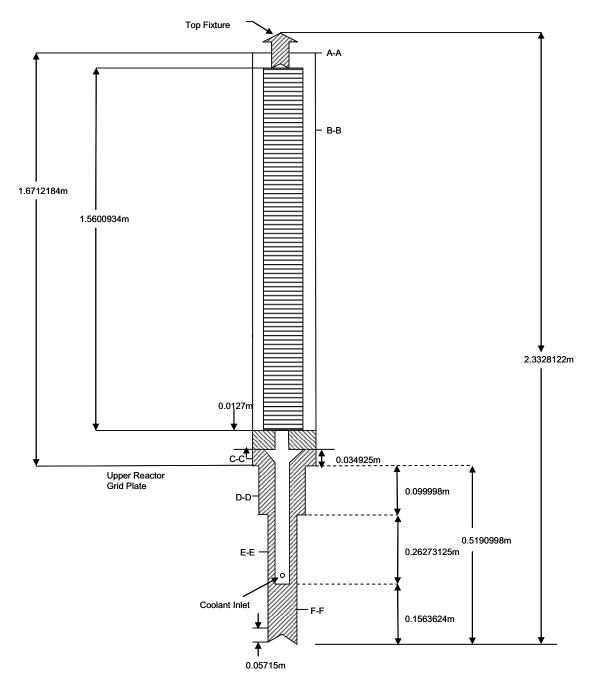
Stainless Steel Radial Reflector Elevation Section
